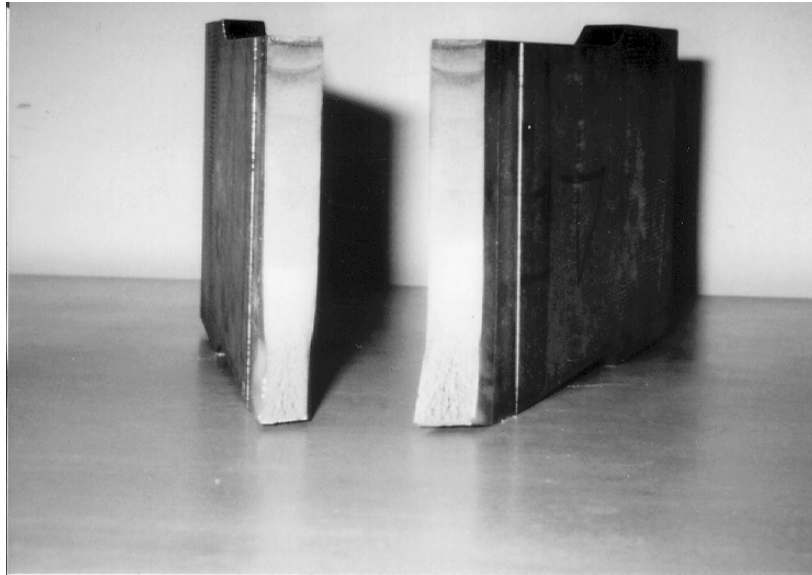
View of fracture surface for center-hole fracture specimen
